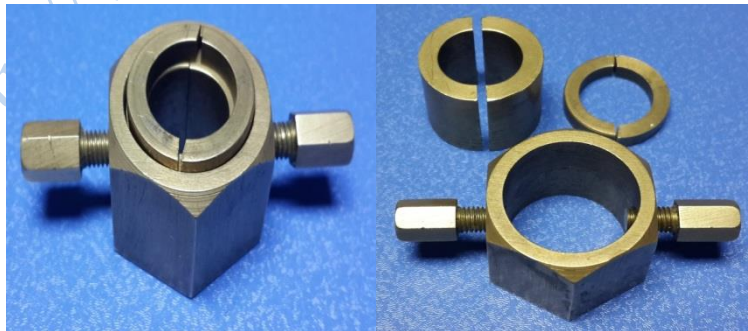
A photograph showing cylindrical copper mold for specimen housing before (left) and after (right) assessment.
